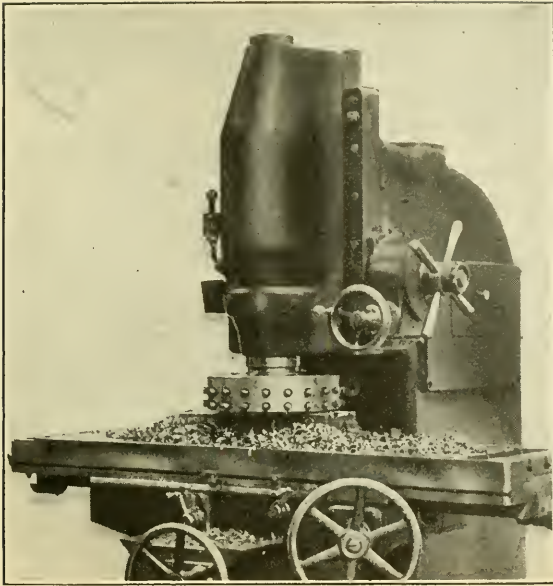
HIGH-POWER FACE MILL OF EARLY CONSTRUCTION, MILLING MACHINE-STEEL TEST BLOCKS. CHIPS RESEMBLE PLANER CHIPS
